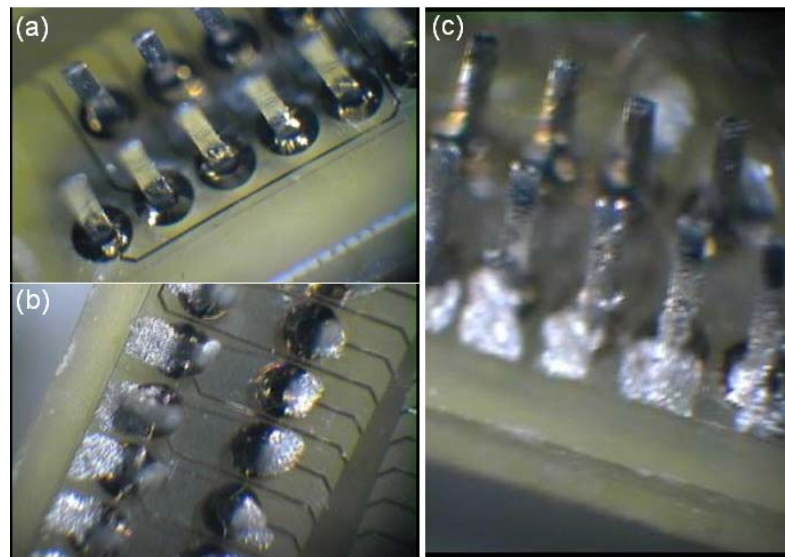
Assembled PPO connector with parylene sheet, PCB, and Omnetics connector; (b) top view of the PPO packaging after conductive epoxy is painted; (c) side view of the PPO packaging after conductive epoxy is painted
